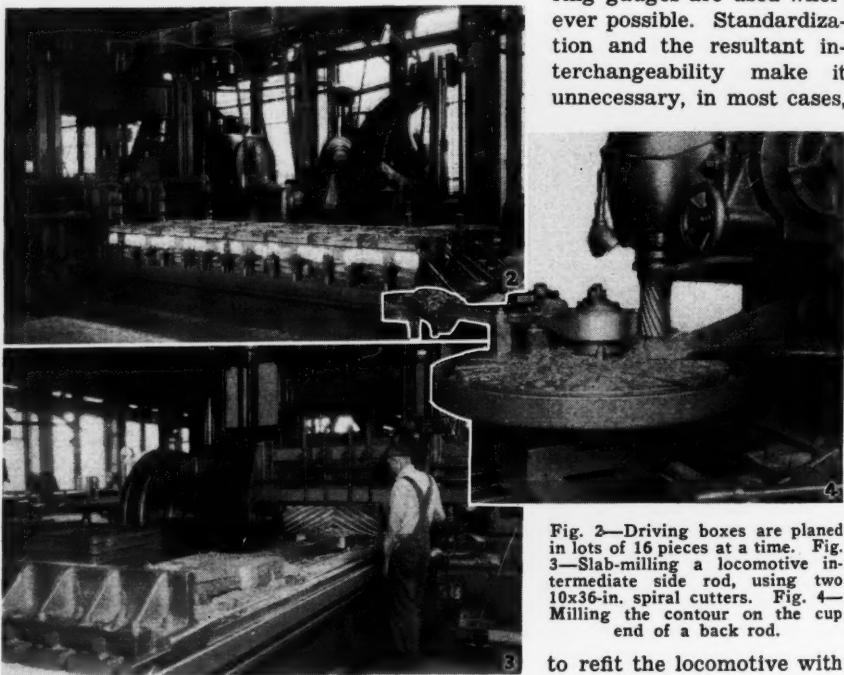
Driving boxes are planed in lots of 16 pieces at a time. Fig. 3—Slab-milling a locomotive intermediate side rod, using two 10x36-in. spiral cutters. Fig. 4—Milling the contour on the cup end of a back rod.
